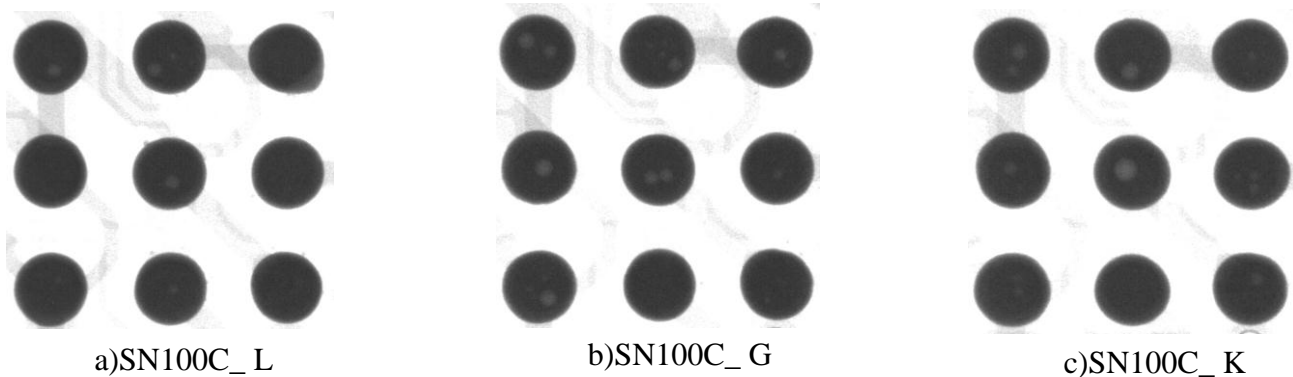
X-Ray images of BGA solder joints reflowed with Sn100C solder pastes. Good SN100C solder paste had similar voiding level as SAC305 solder paste (Figure 14a). Many evaluated SN100C solder pastes had slightly more voids than the control SAC305 solder paste (Figure 14b and Figure 14c).
